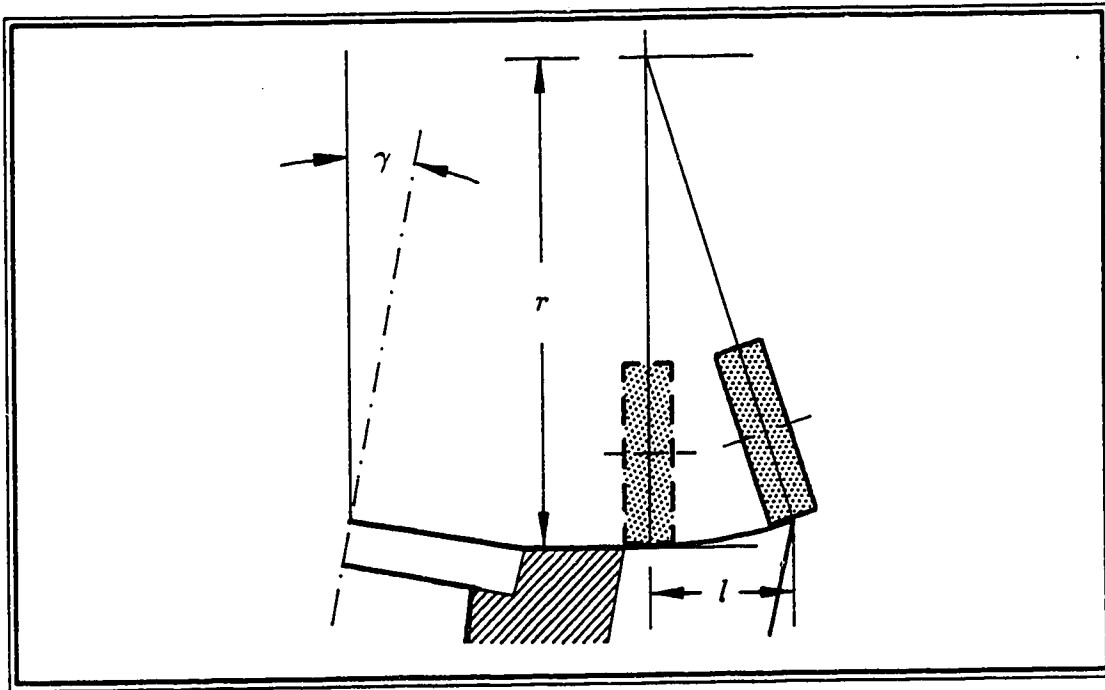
Grinding wheel assembly lies directly above root of cutter teeth
